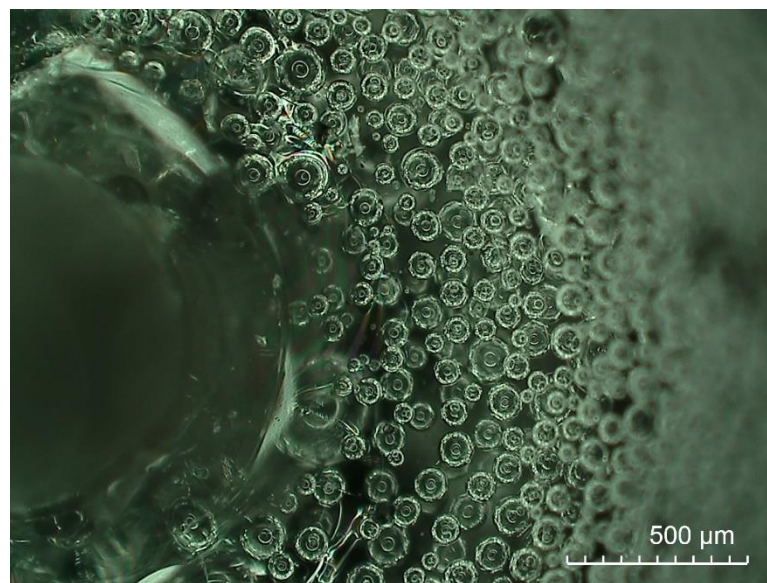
Optical image of the top surface of a printed preform seal showing the bubbles trapped in the glass.
